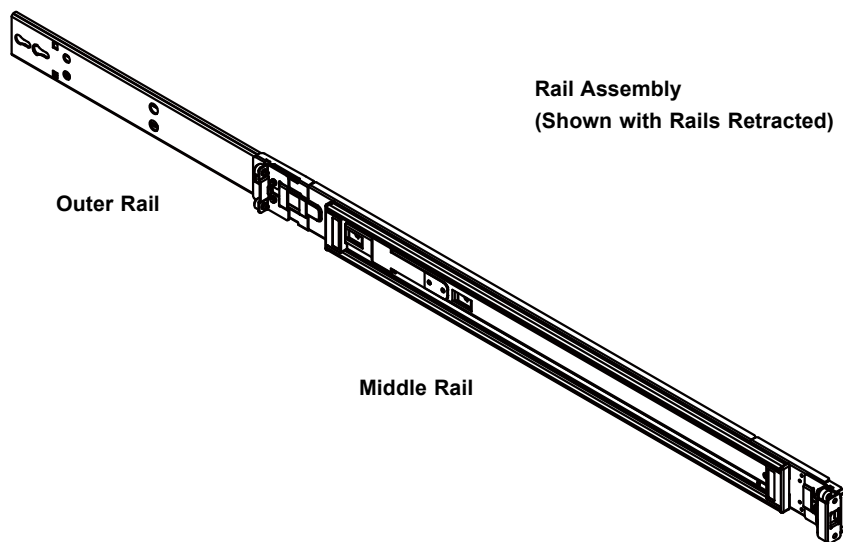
Identifying the Outer Rail, Middle Rail, and Inner Rail (Left Rail Assembly Shown)
